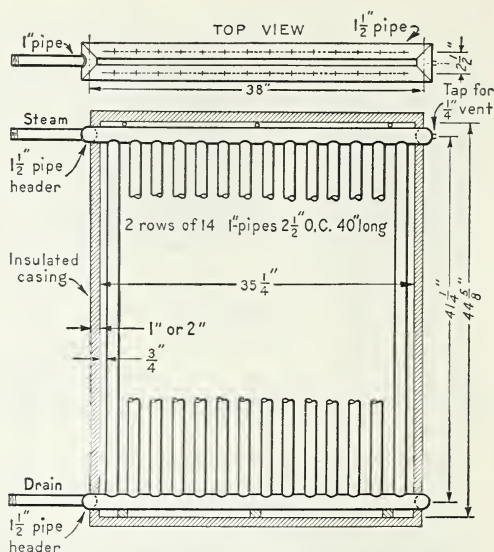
Welded iron-pipe unit for heater for seed-cotton drier. (The top and sides of the insulated casing are built on the heater after the units are assembled.)
